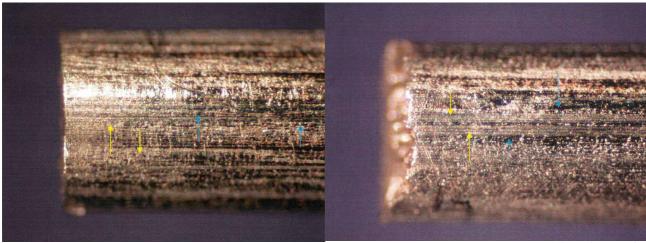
The long and the short end fracture surfaces. The yellow arrows indicate the origin of the fatigue fracture
